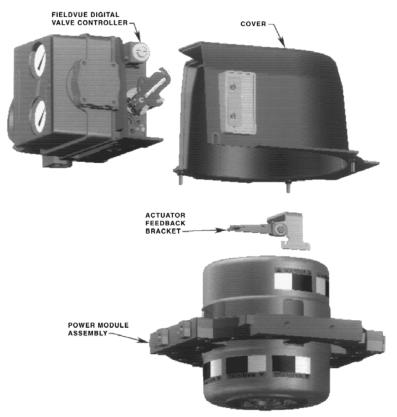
Piston cylinder actuator with canister assembly and integral positioner. (*Courtesy* of Fisher Controls International, Inc.)
